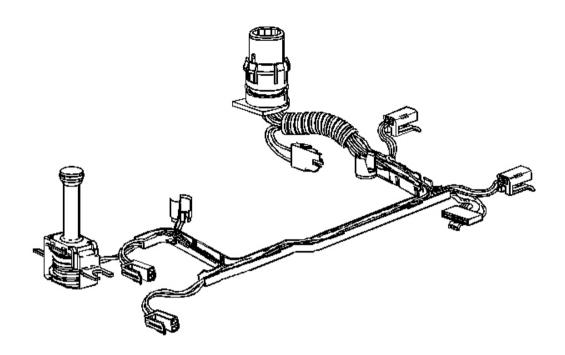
TCC Wiring Harness Courtesy of GENERAL MOTORS CORP.
